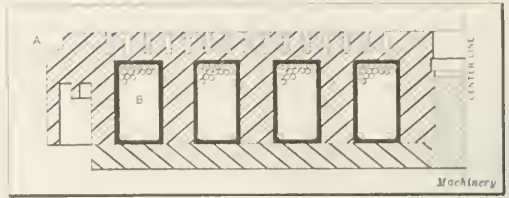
Cross-sectional View taken on Radial Line from Center, showing Construction of Blanchard Magnetic Chuck
